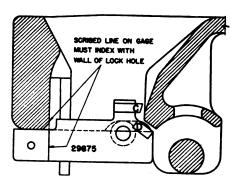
Gage No. 29875 properly applied to incorrectly modified coupler as in Fig. 3—Clearance at C and D must be built up by welding as in Fig. 5
